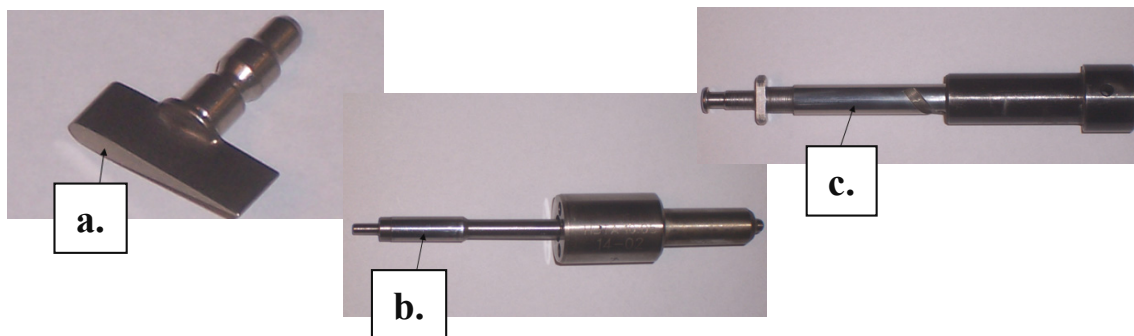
Test pieces (a. turbo loading blade, b. carburetor nozzle, c. fuel feeder)
